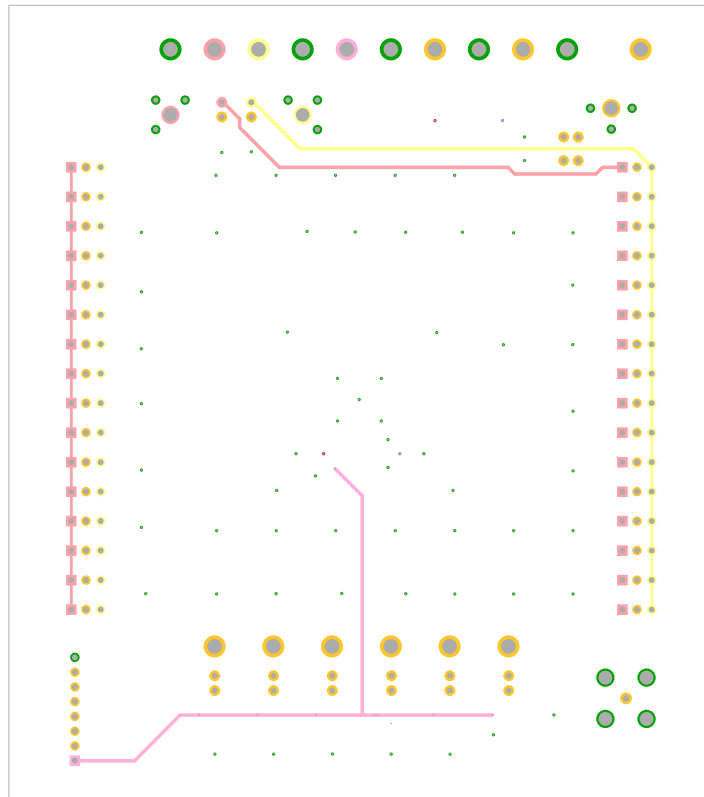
PCB - BOTTOM LAYER (TOP VIEW)
